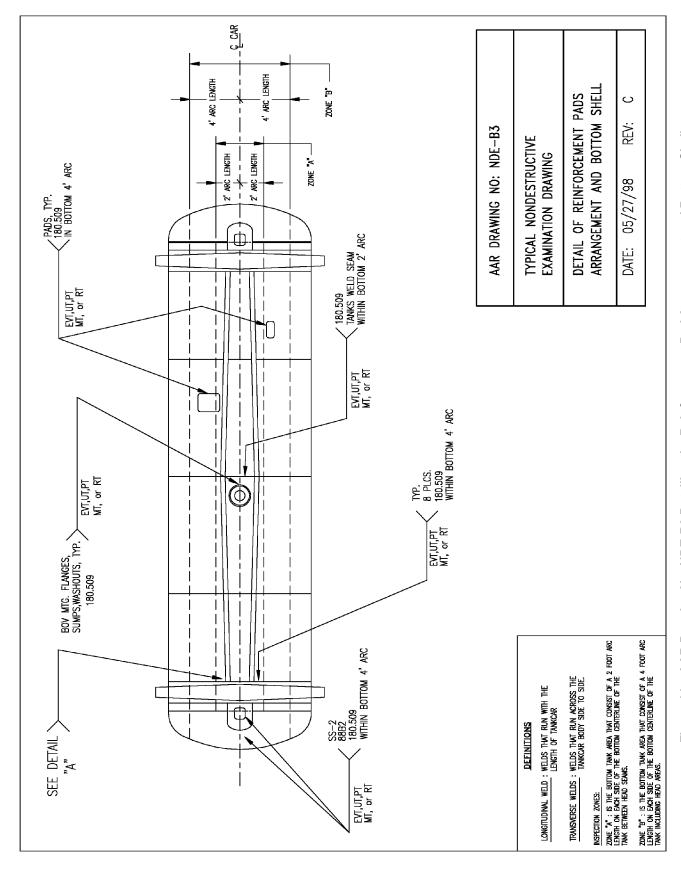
AAR Drawing No. NDE-B3 Detailing the Reinforcement Pad Arrangement and Bottom Shell
